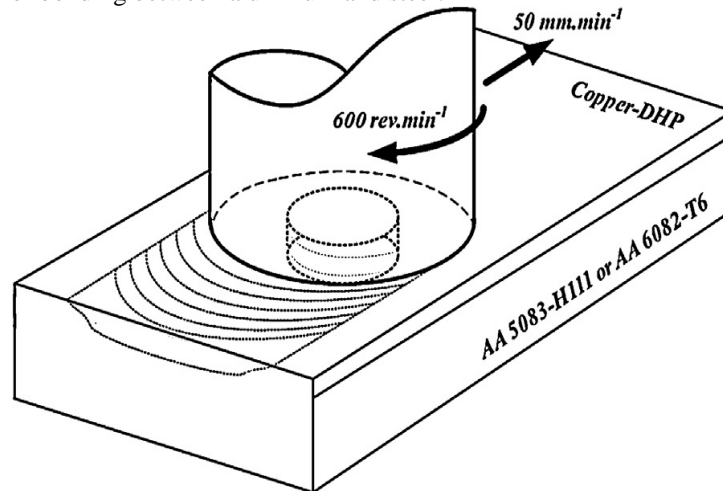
Schematic representation of Al/Cu friction stir welding.
